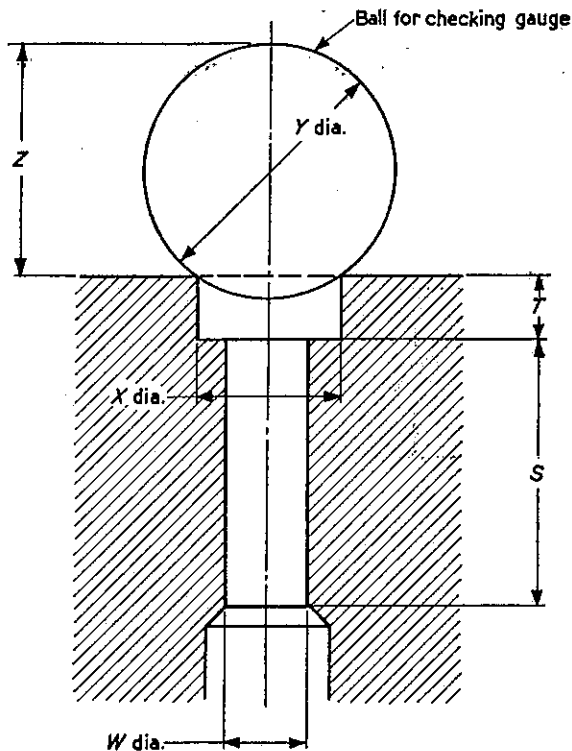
Protrusion gauge block (see Fig. 5 and A.7.)
